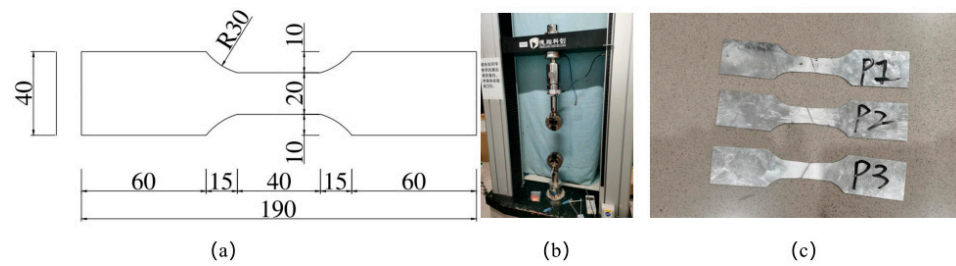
Tensile coupon tests. (a) Nominal dimensions of the tensile coupons (mm); (b) Universal testing machine; (c) Fractured tensile coupons.
